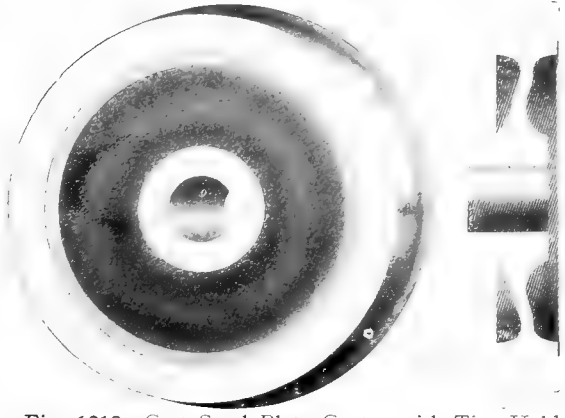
Cast Steel Plate Center with Tire Held by Shrinkage and Shoulder.
